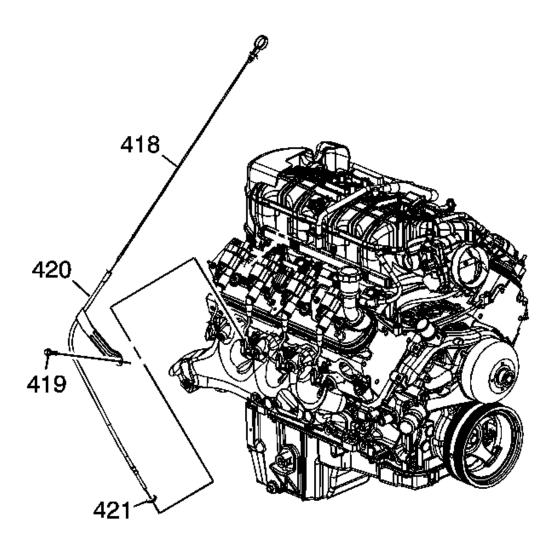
View Of Oil Level Indicator, Tube Bolt, Indicator Tube & O-Ring Seal Courtesy of GENERAL MOTORS CORP.
